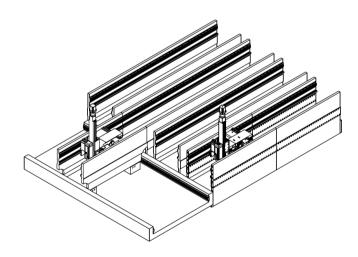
Reconfigurable machining system with four lines, one distribution structure
